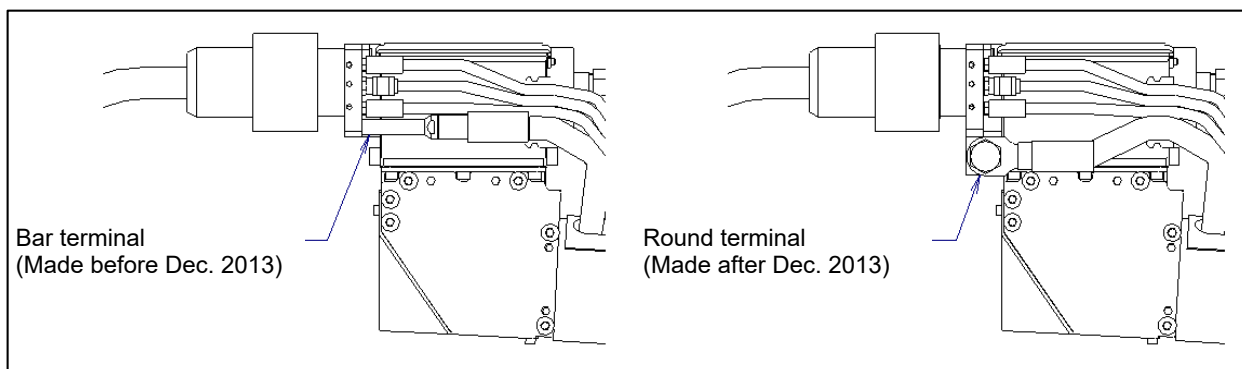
(a) Connection terminal of the torch adapter and the welding power cable
